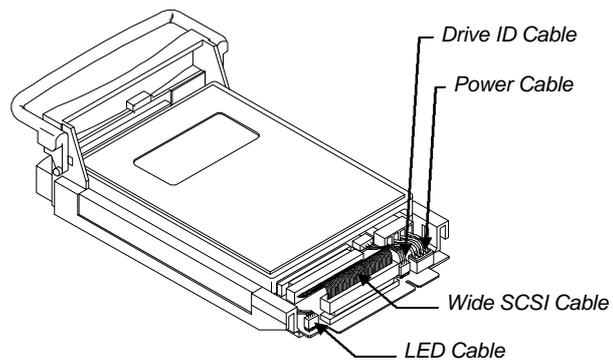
Connecting the Drive Cables (Wide SCSI Drive)
